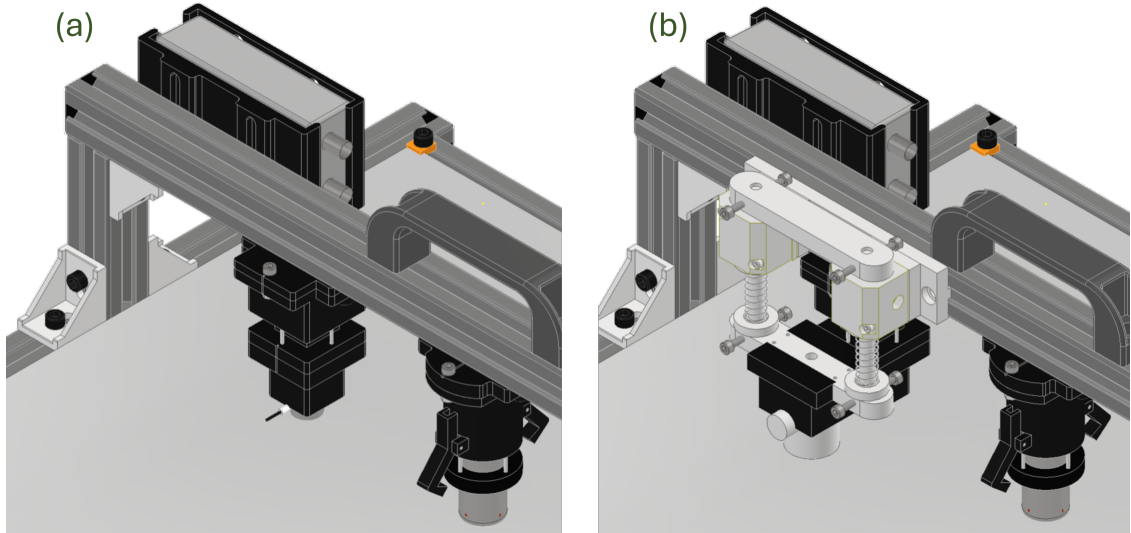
(a) The SUT 3D-printed coupling mechanism. (b) SUT improved coupling mechanism with original sliding bushings and tighter tolerance sliding bushings. Adapted from [23].
